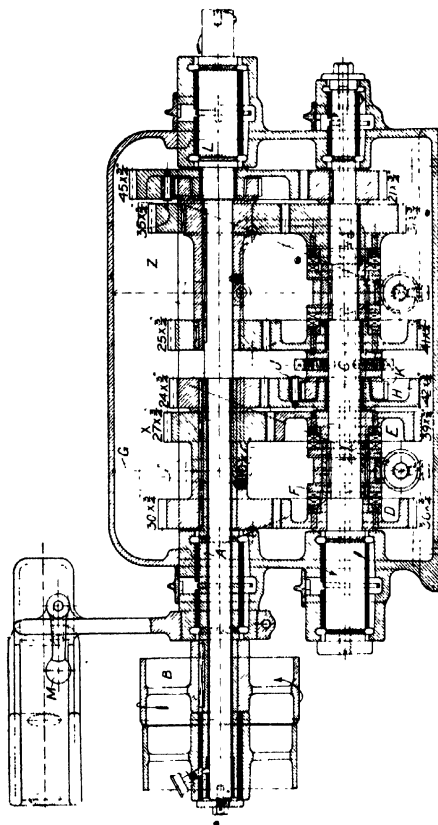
Nine-speed change gear box with clutches and silent pawl.
